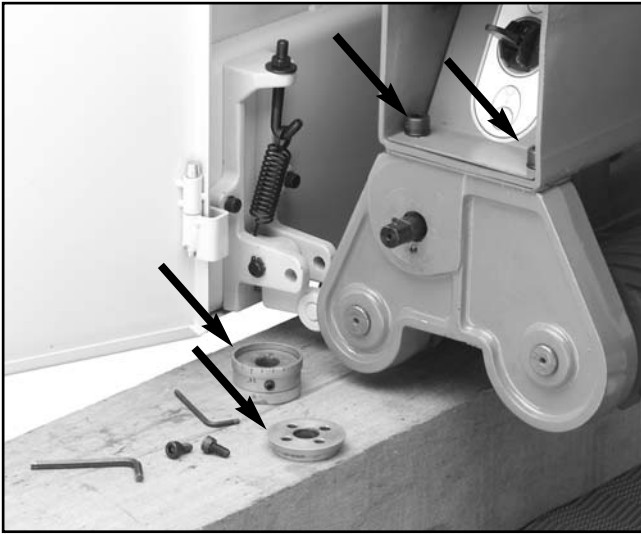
Remove platen adjustment knob, indicator plate, and large cap screws.
